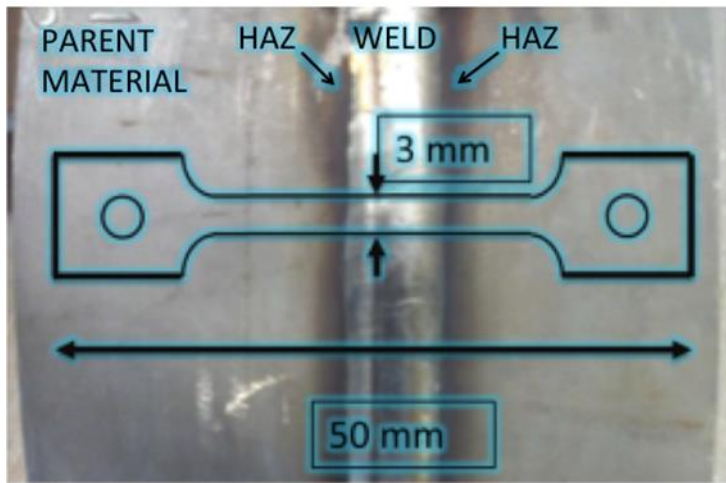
Sketch of miniature tensile samples machined from the welded pipe.
